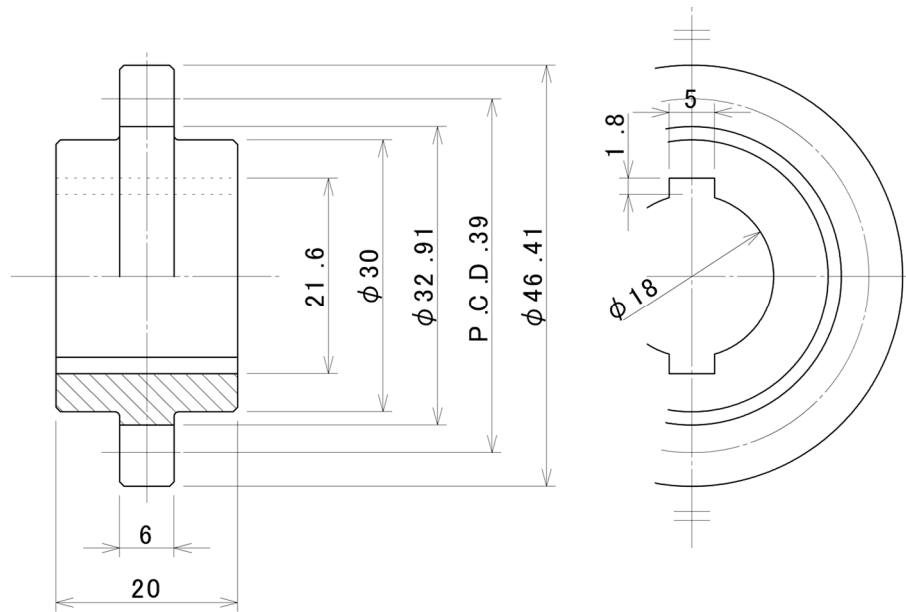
Drawing of P/M spur gears used single-tooth bending fatigue test
